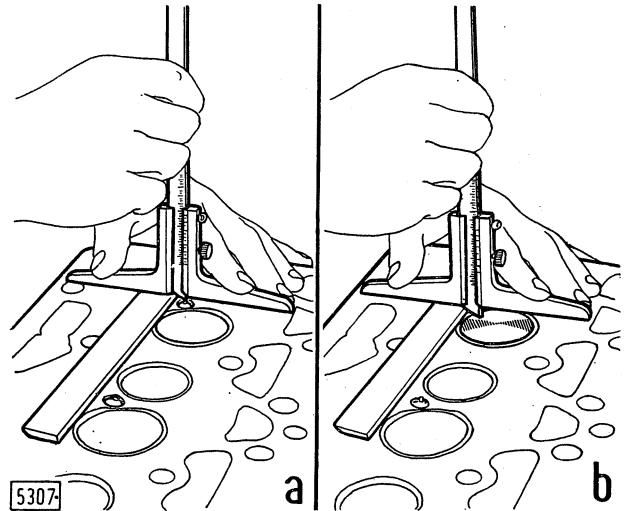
Measuring nozzle projection above cylinder head plane (a) and valve recessing (b).
